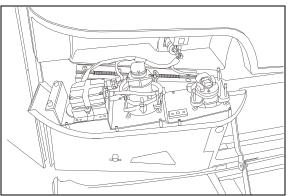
OPENING HEADLIGHT ASSEMBLY
